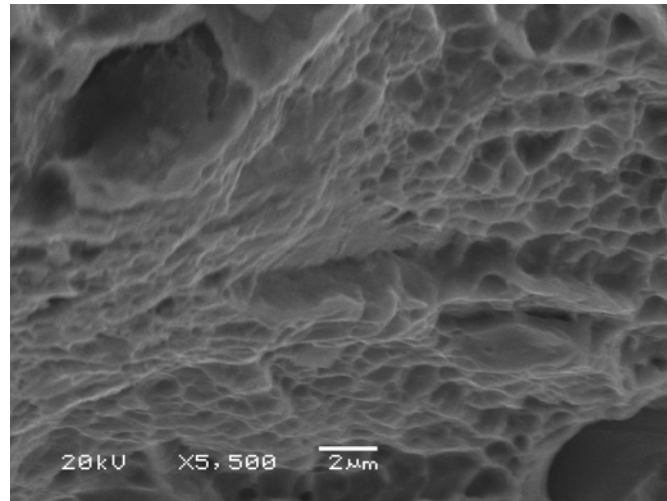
Fractography of the region close to the screw thread showing some grain boundary secondary cracks.
